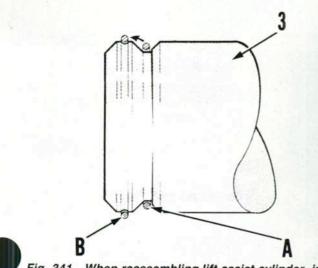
When reassembling lift assist cylinder, install retaining ring in deeper groove (A) and push piston into cylinder. Then working through cylinder port, roll the retaining ring into assembly groove (B).
